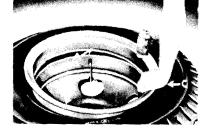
Mounting and Demounting 15° Drop-Center Tubeless Rims
